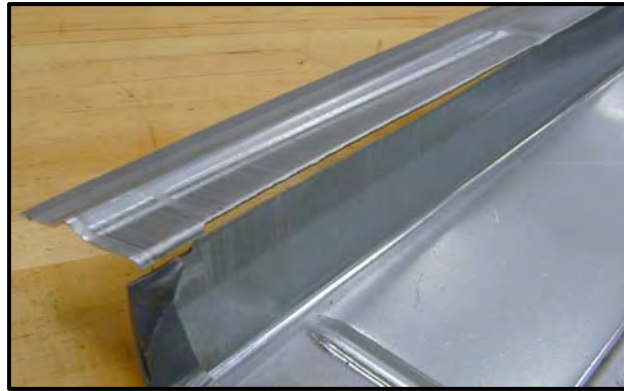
B-25: Typical shear fracture on a DP780 part. ^{M-7}
